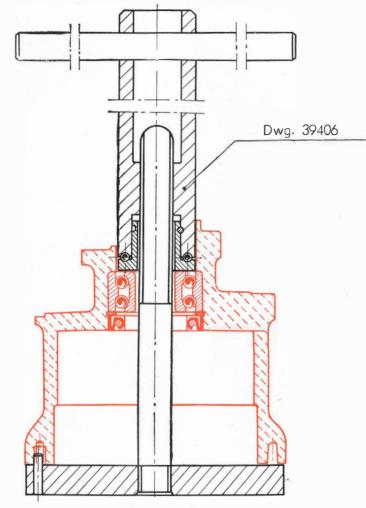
Detailed drawing showing the removal of the roller bearing.
